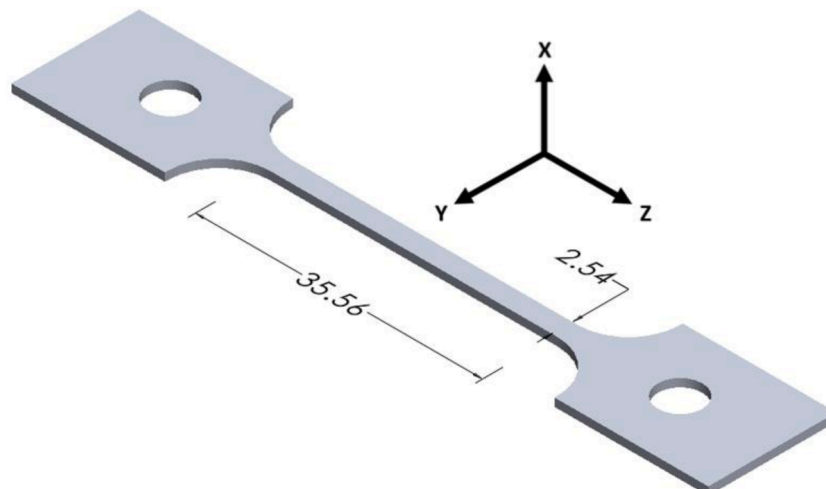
Isometric view of a creep specimen. All dimensions are in mm.
